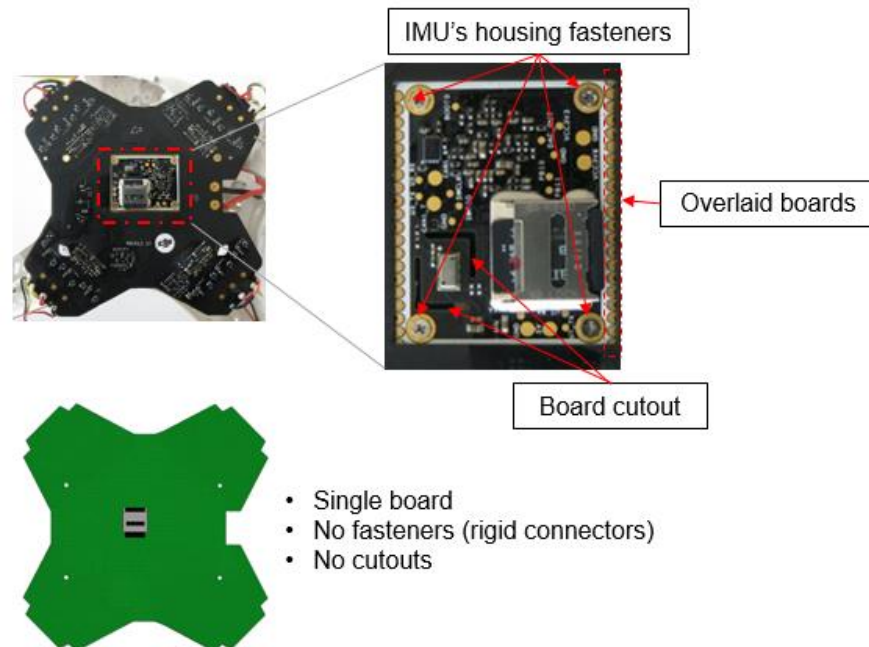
Board assembly LVI – Discrepancies between test specimen and FEM.
